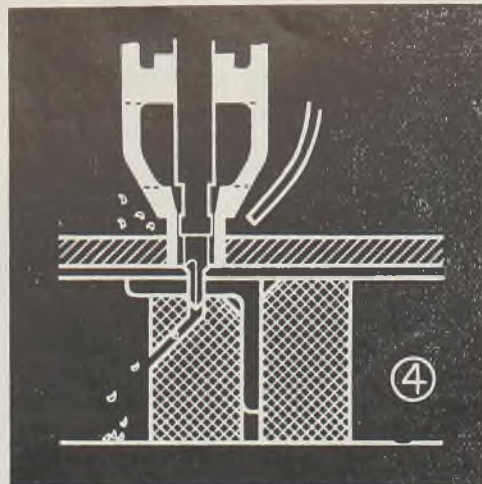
Aircraft panel fabrication is speeded by fitting the combination drill and countersink with a guide bushing which fits in a hole in the template shown cross-hatched. This positions drill and countersink for drilling the skin and stringer clamped in Masonite jig blocks. Note outlet for chips
